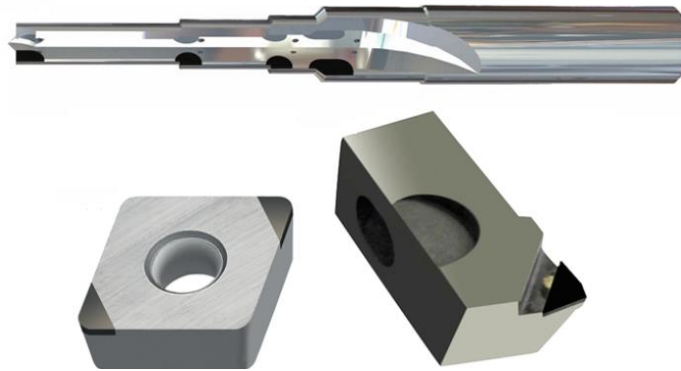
Typical cutting tools with PCD inserts: drill, turning insert, and milling tool cartridge [1].
